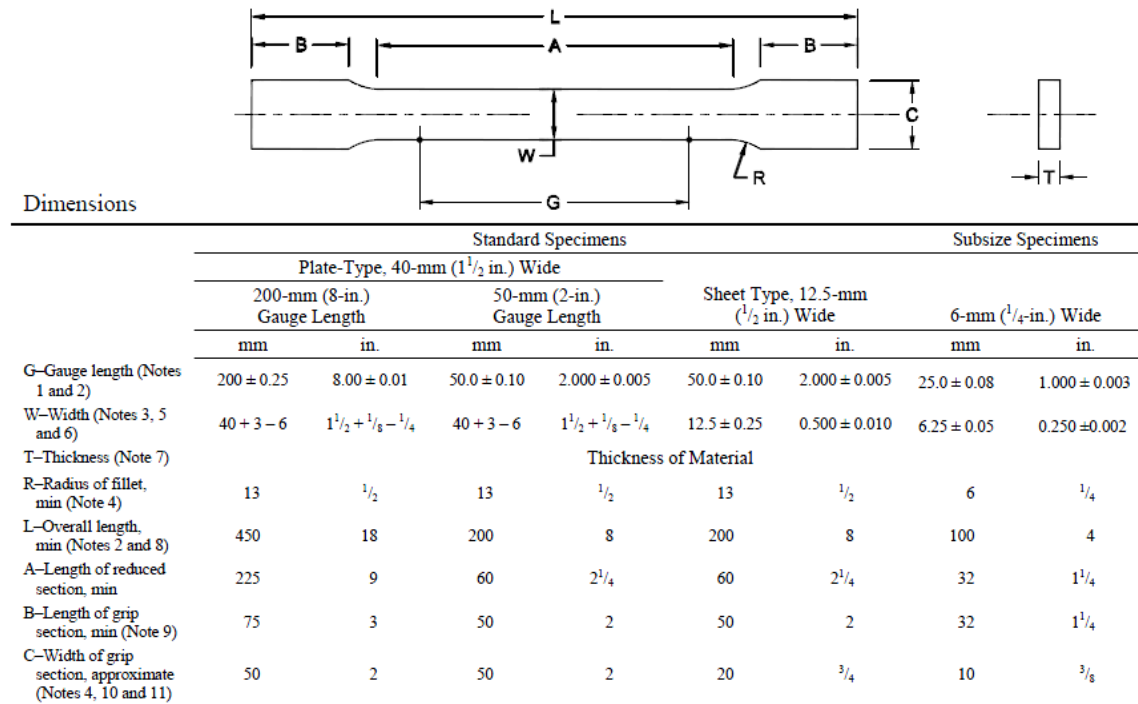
ASTM-A 370-08 Standard dimensions for tension coupon test
